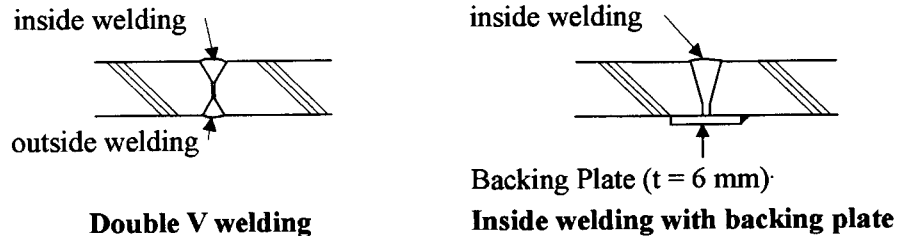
Recommendable Clearance for Joint Welding
